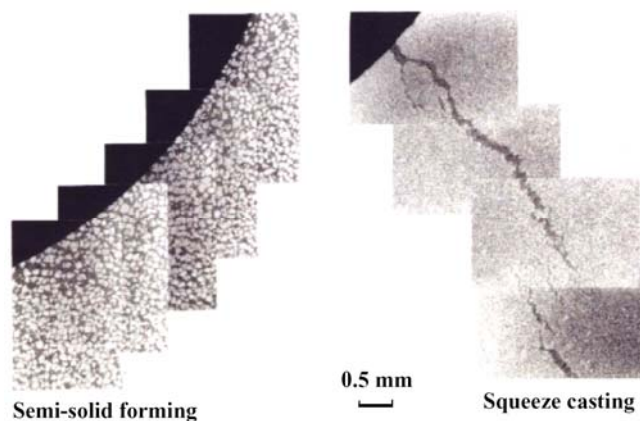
Hot tear cracks exist at the corner of a squeeze casting part (right) in magnesium alloy (AZ91). [76]
